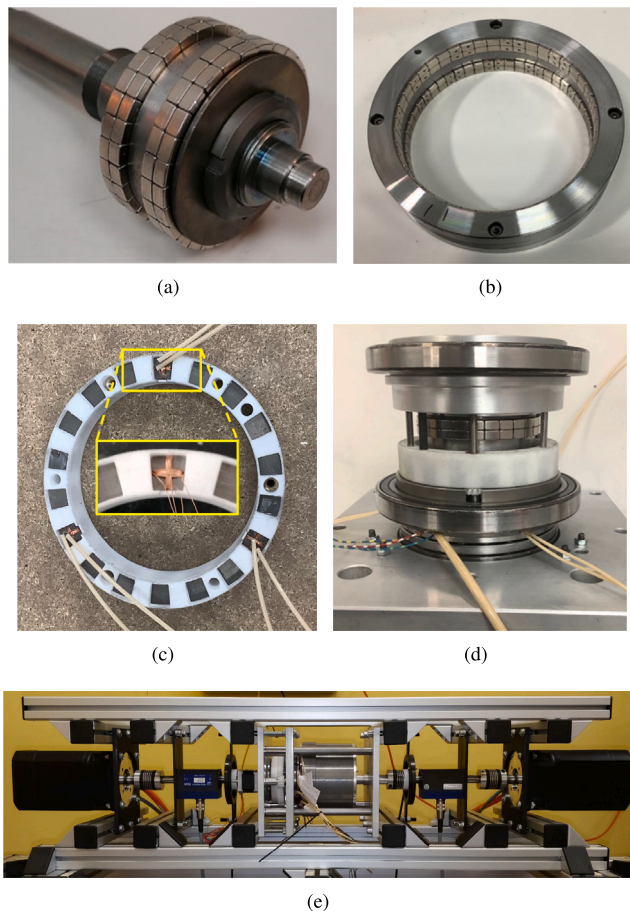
Assembled sun (a) and ring (b) rotors, carrier (c) with ferromagnetic poles, inner of magnetic gearbox prototype (d) during mounting and assembled test rig (e).
